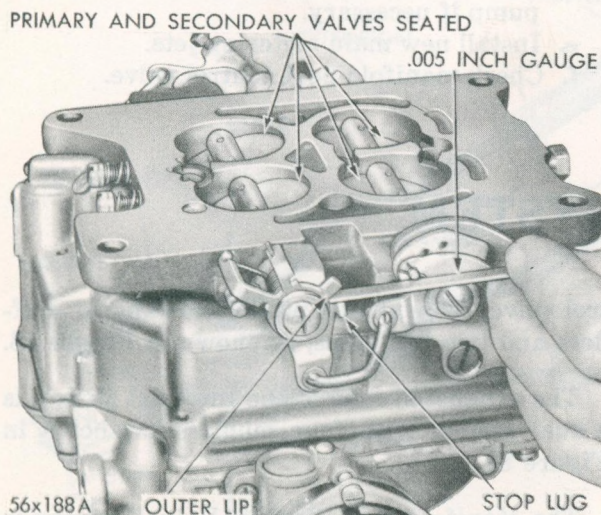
Checking Opening of Secondary Throttle Valves (Step 3)
